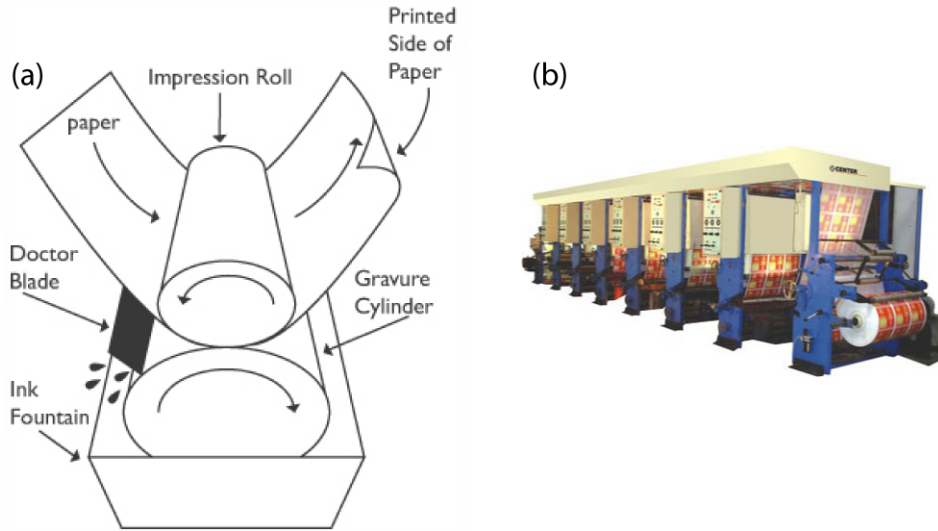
(a) Diagram of rotogravure printing process (b) Multi-color rotogravure printing machine. Source: R.H. Technocrates Center
